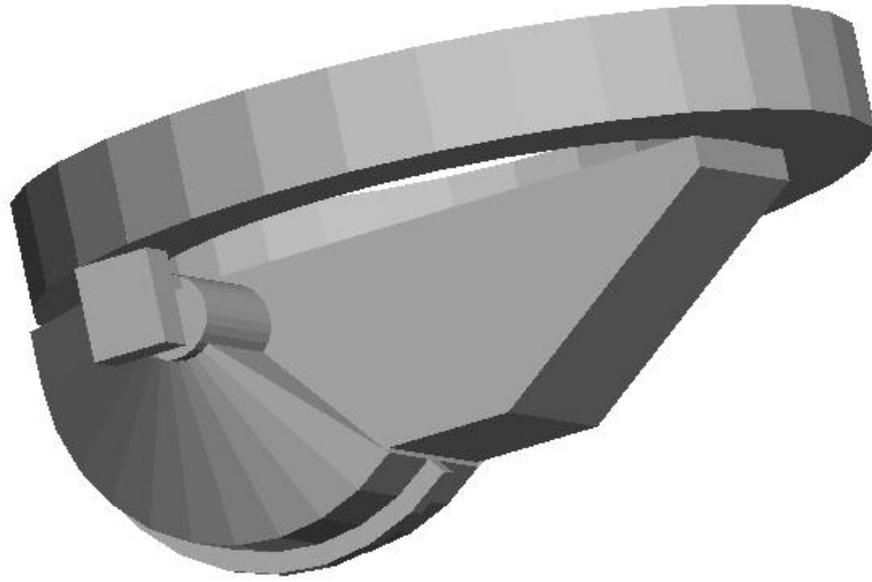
shaded view on the assembly of receiver cabin, hub and ring box
